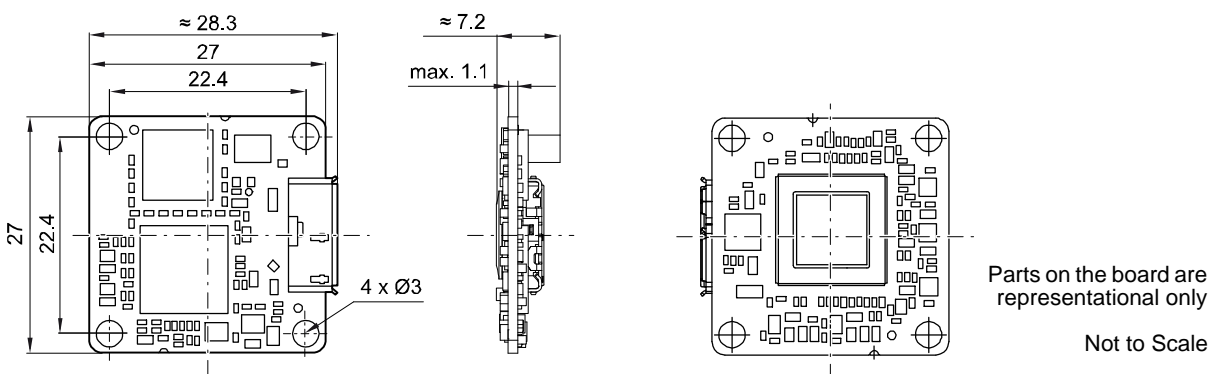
Mechanical Dimensions (in mm) for Bare Board Cameras
